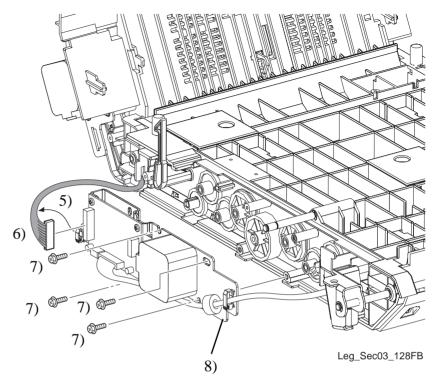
Removal of LATCH DUP R and LATCH DUP L (1)
